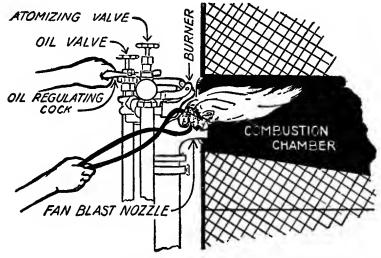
View showing the proper place to hold the torch for lighting a furnace burner.
